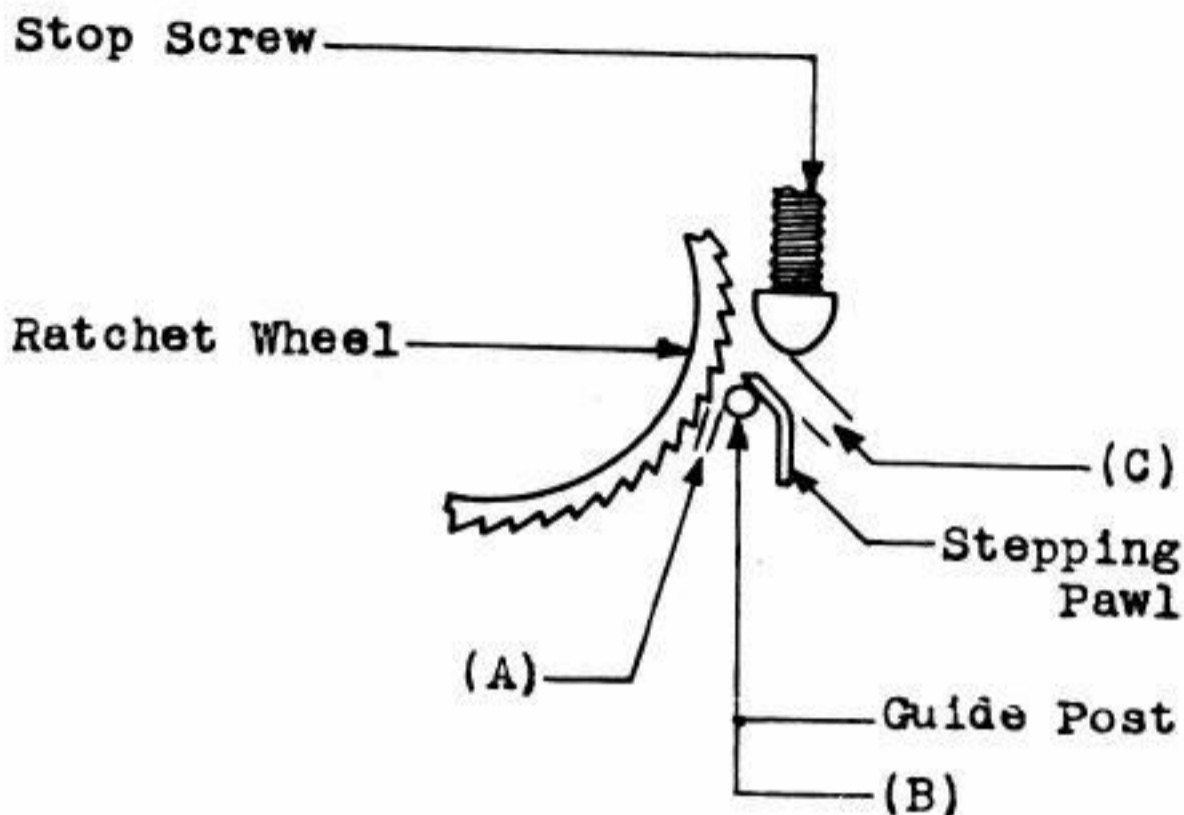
Clearance Between Stepping Pawl and Ratchet Wheel
